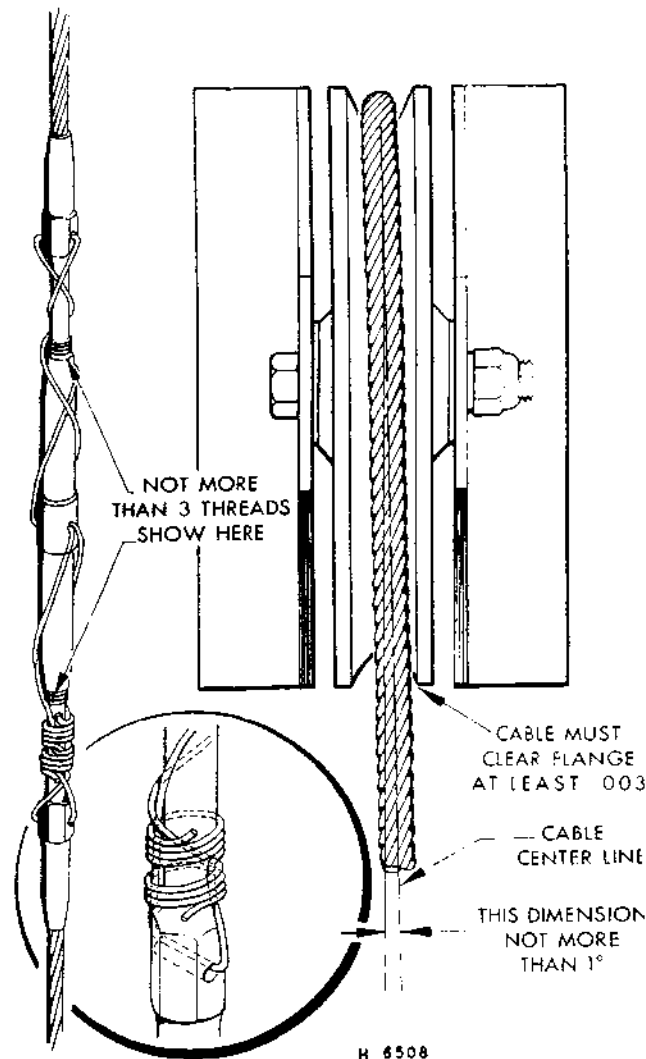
Cable Pull-off and Turnbuckle Adjustment
